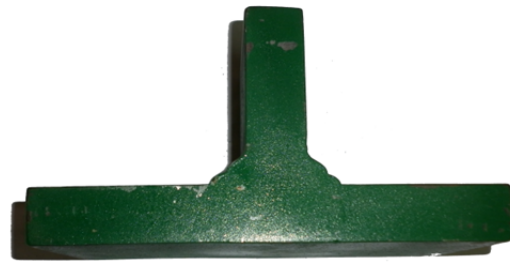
Fillet Joint, Equal Thickness < 19mm
